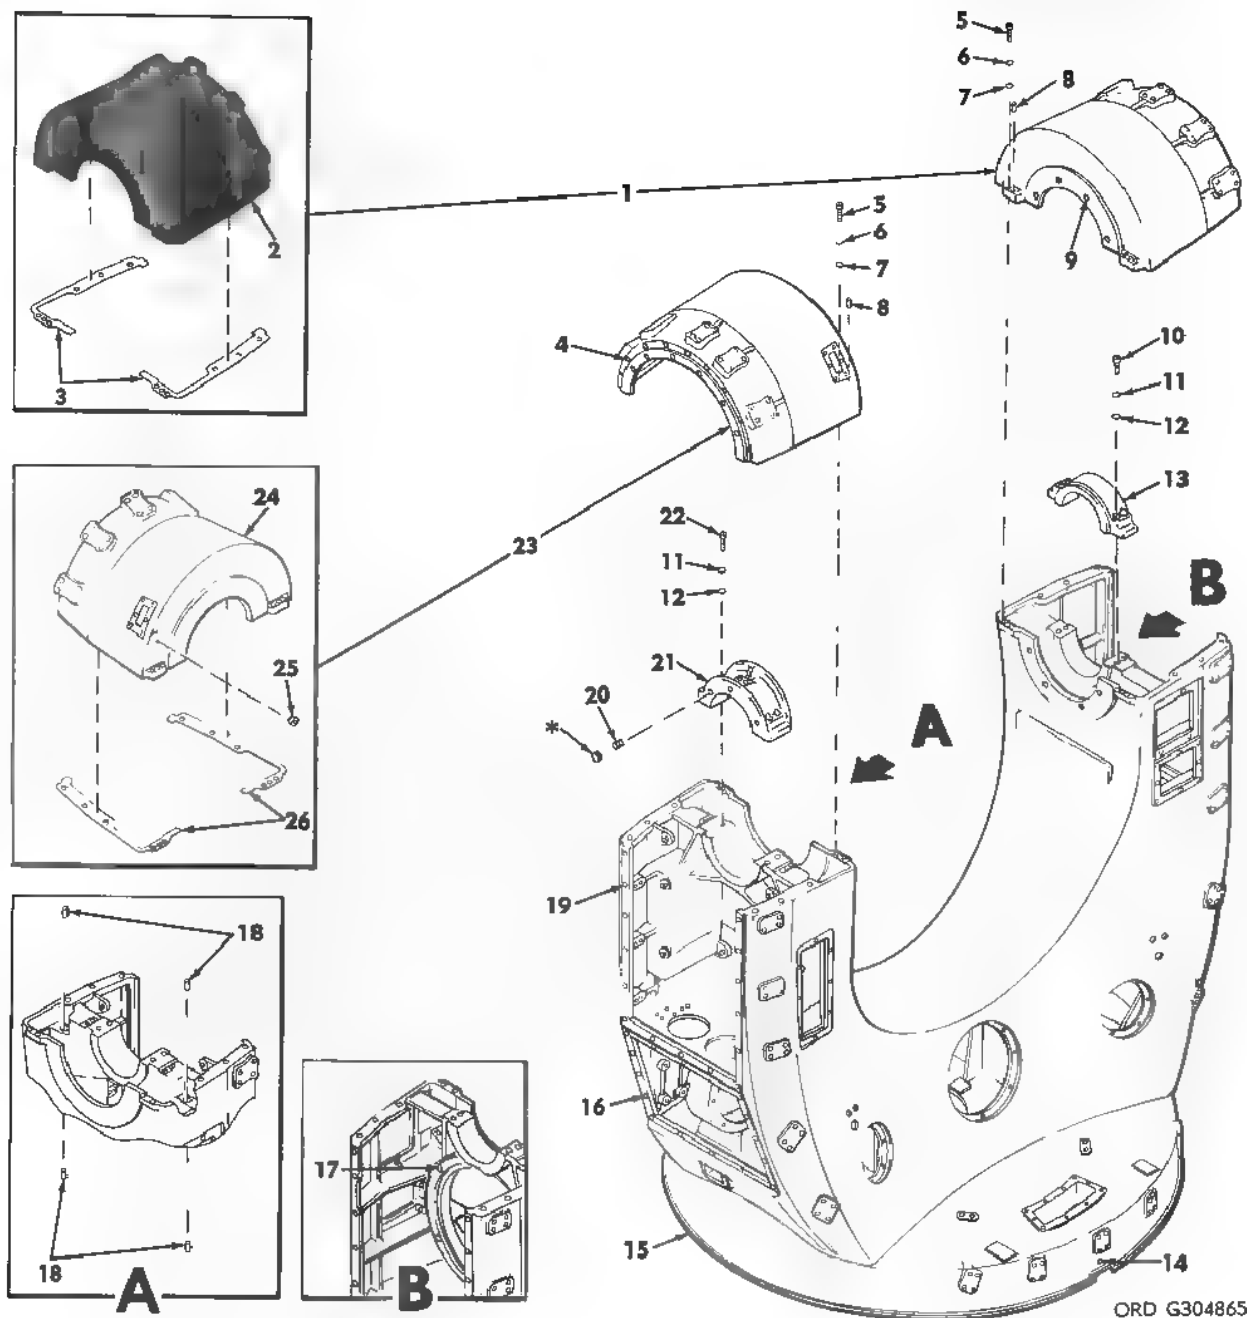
COVER /8172240/-EXPLODED VIEW
